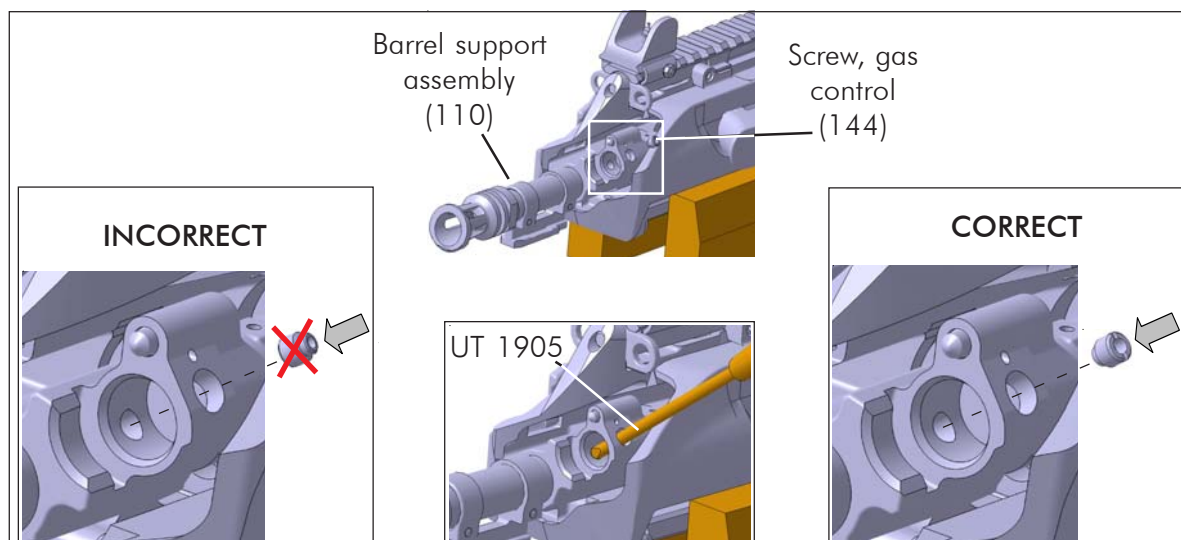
p - Reassembly of the screw, gas control (144)
